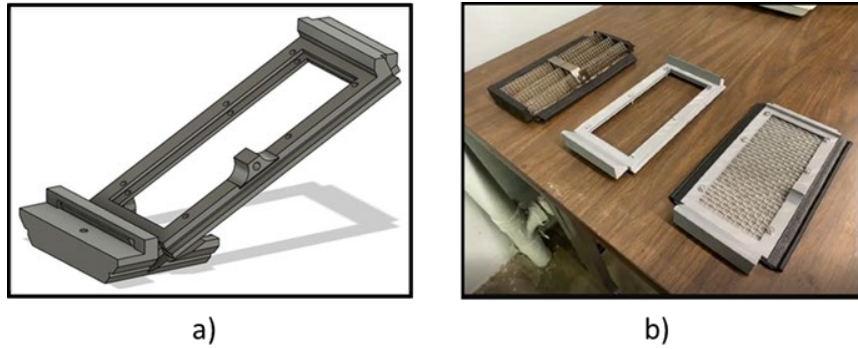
The mesh frame-adapter assembly a) Illustrated in a CAD drawing, b) Additively manufactured frames
